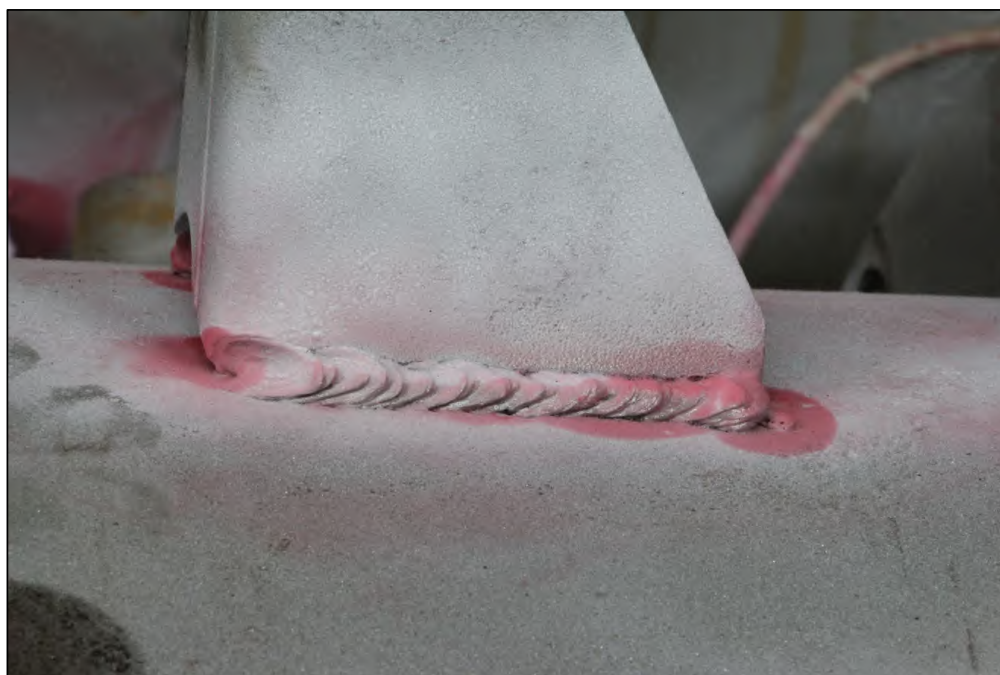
Image of the Lug B1 exterior top weld after dye penetrant media had been used during inspection.
